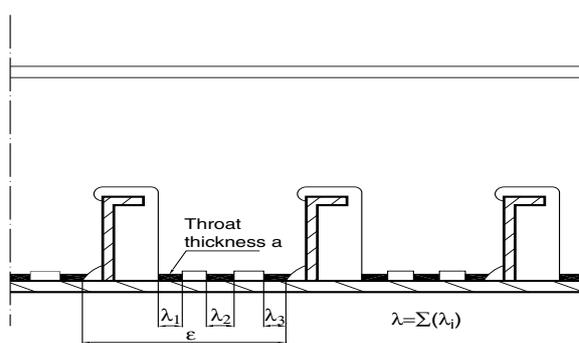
Intermittent scallop fillet welding between cut-outs
